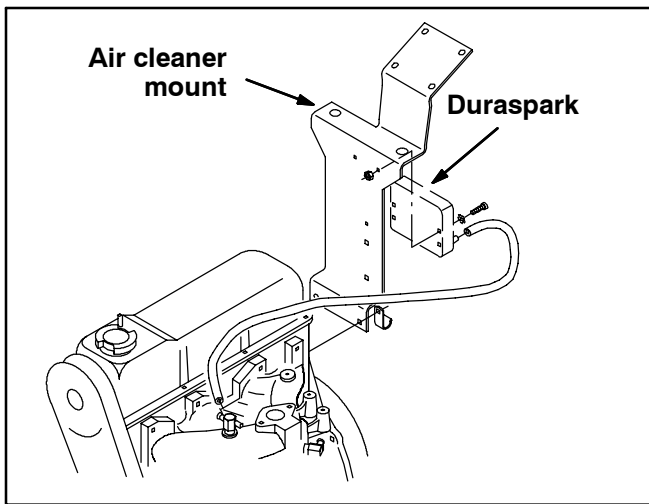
Air Cleaner Mount And Duraspark Assembly
